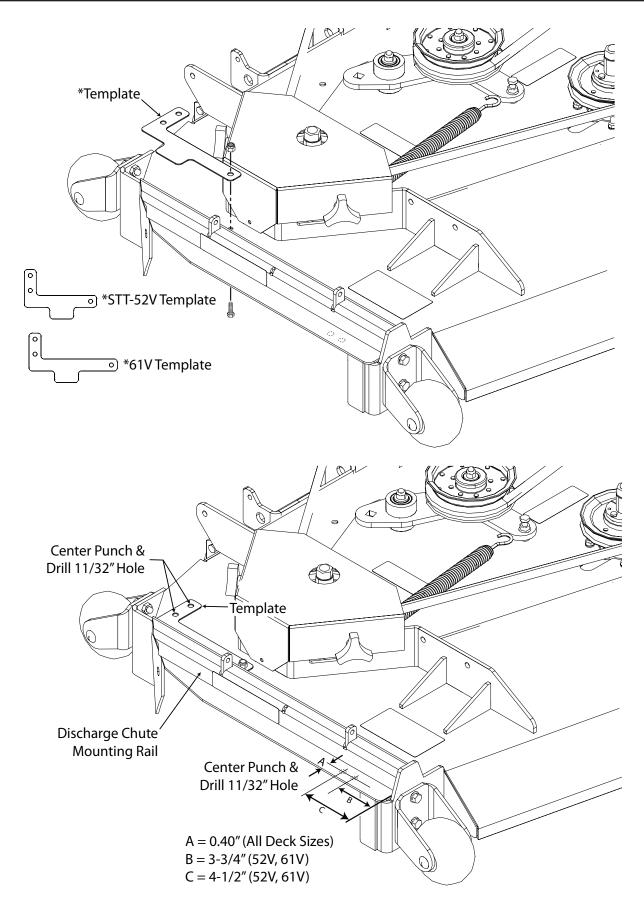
Locating and Drilling the Mounting Holes for SCZ & STT-52V/61V
